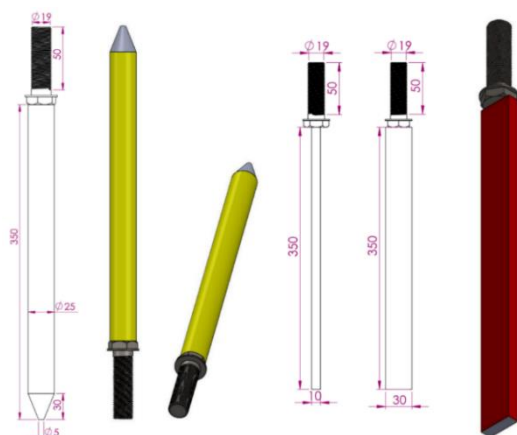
provides a side view showing the shapes of the circular and rectangular teeth, along with their dimensions in millimeters (mm)
